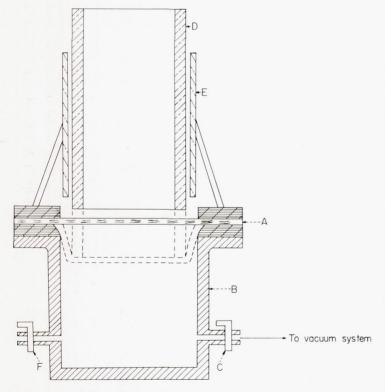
Schematic drawing of vacuum stretching apparatus. A, plastic sheet to be stretched; B, forming vessel; C, valve to vacuum system; D, form; E, guide; and F, valve to atmosphere.
